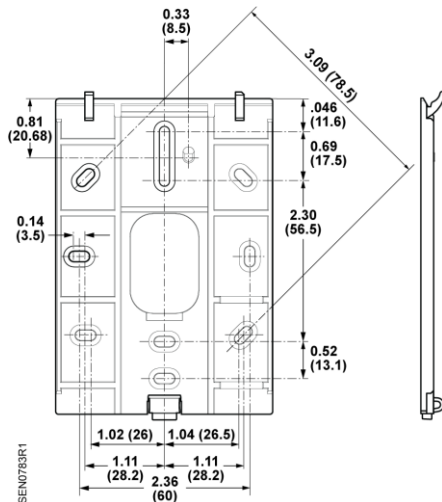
QMX3 Series Room Unit Dimensions in Inches (Millimeters).
